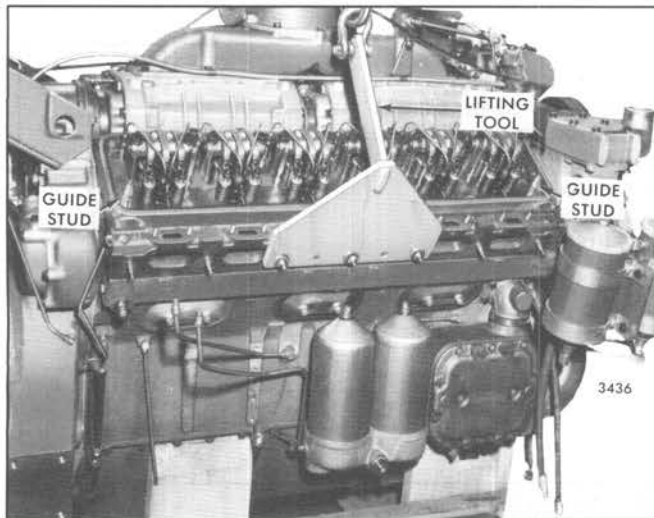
Removing or Installing Cylinder Head using Tool J 22062-01
